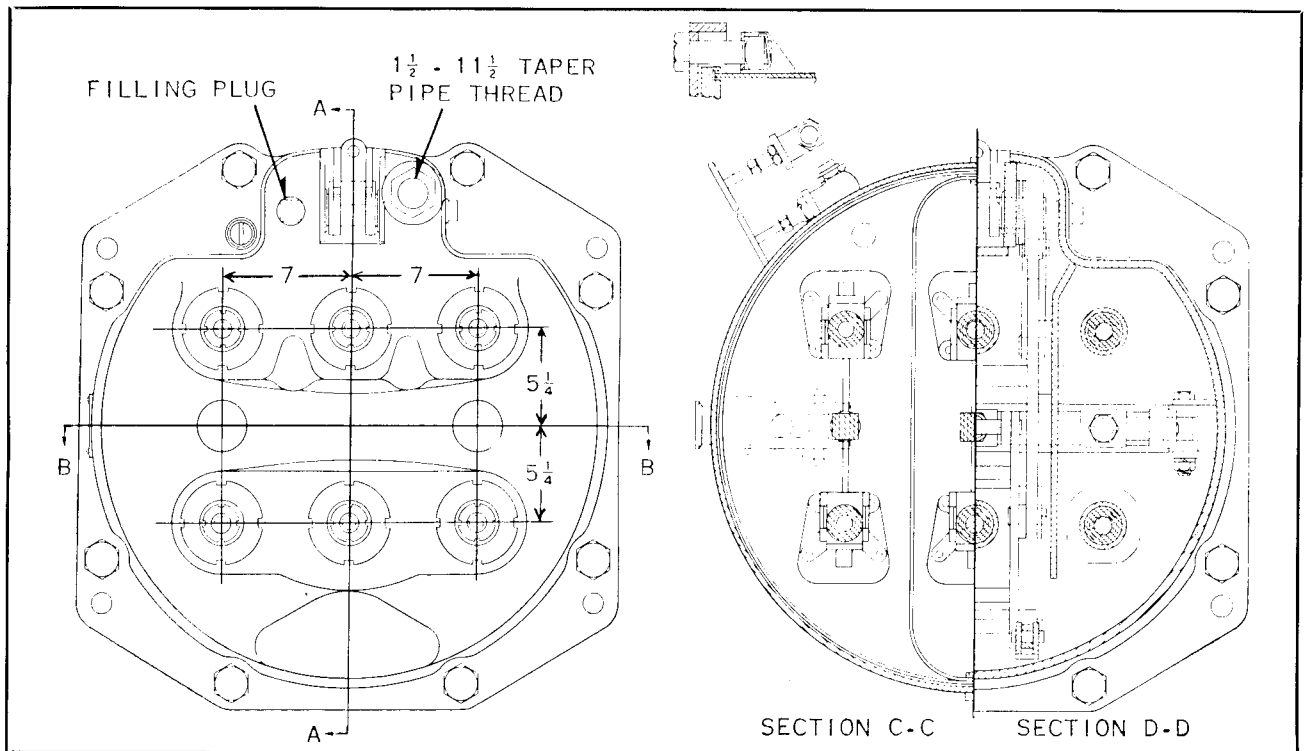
Top and Sectional Views for Type B-28-B Circuit-Breakers
